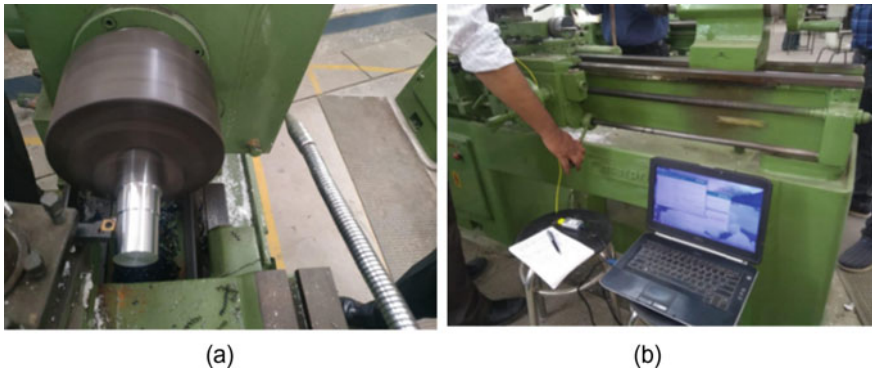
a Turning in dry conditions, b complete machine setup
